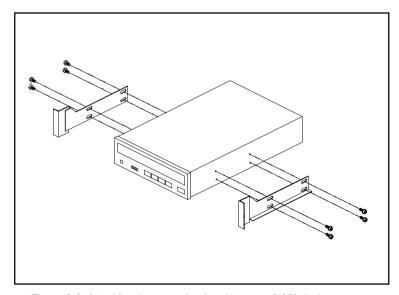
Attaching the mounting brackets to a 5.25" device
